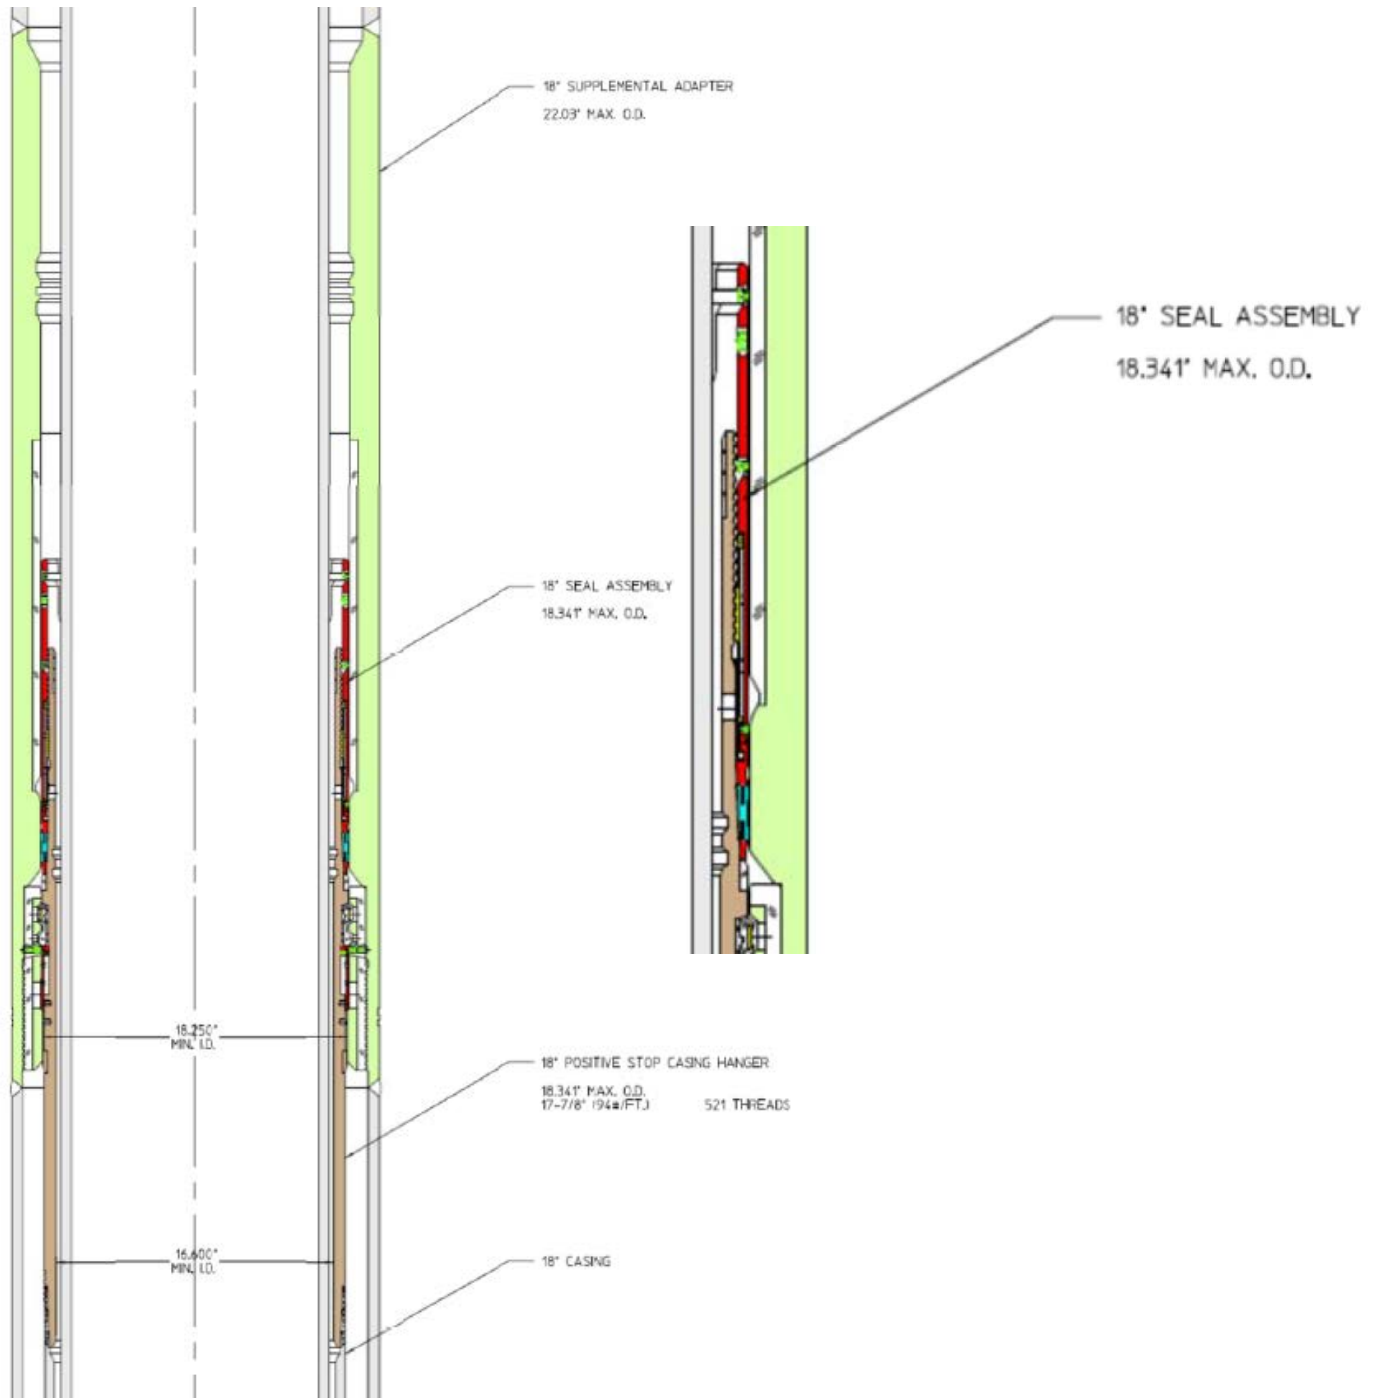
SEAL ASSEMBLY SCHEMATIC
